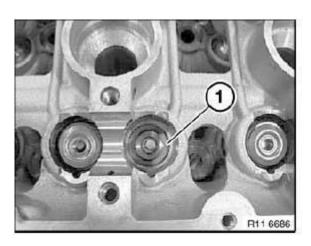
Identifying Lower Spring Plate, Progressive Valve Spring And Upper Spring Plate Courtesy of BMW OF NORTH AMERICA, INC.
